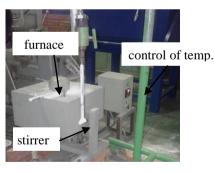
The experimental apparatus for producing the composites by the stir casting method and tensile test mold
